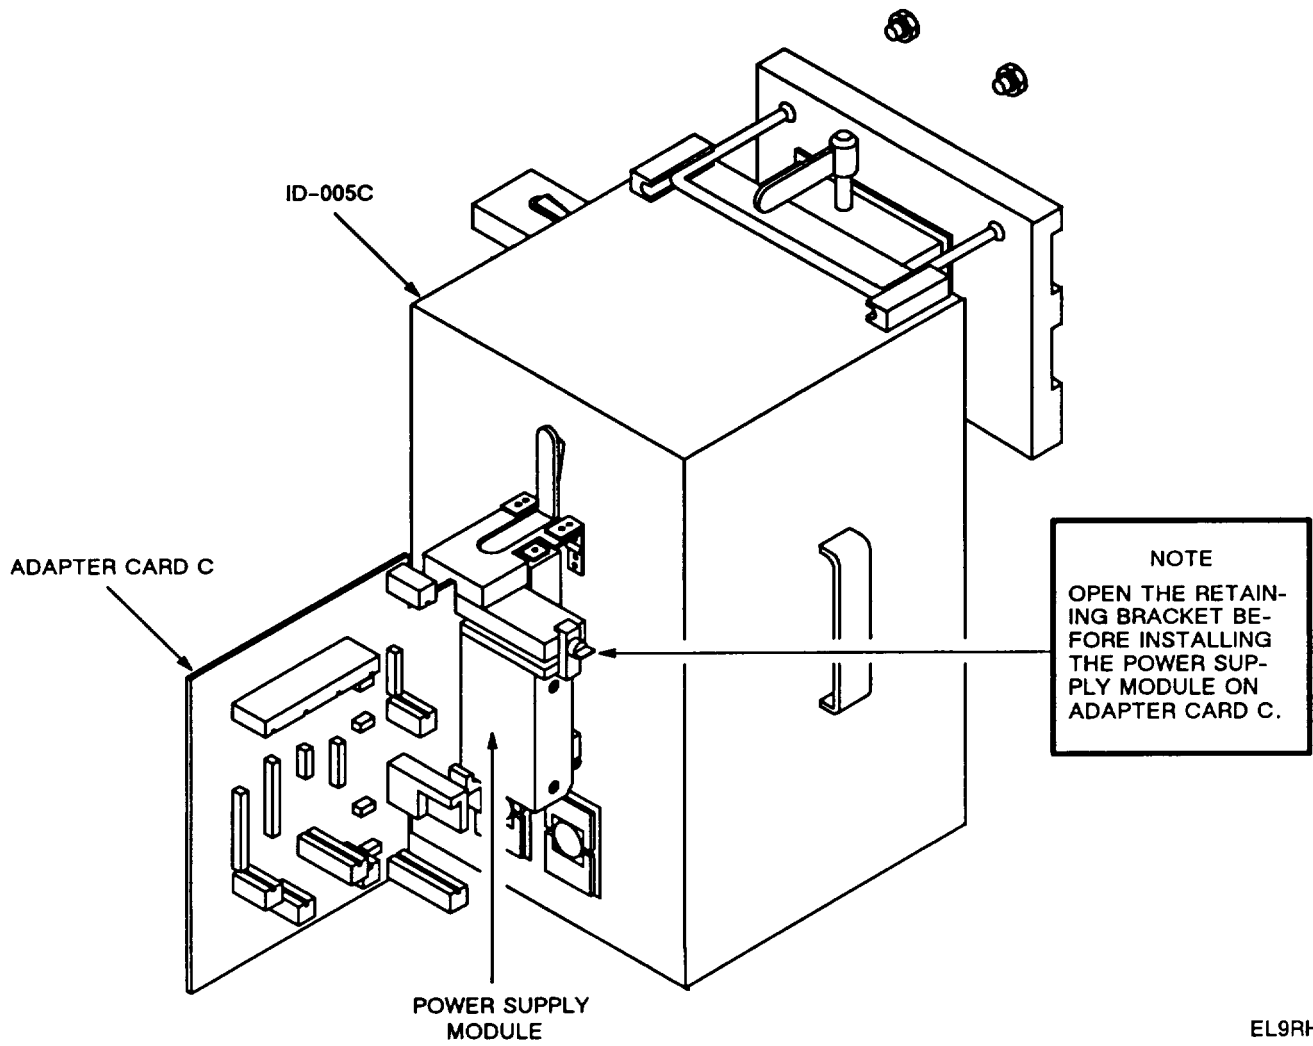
Installation of Power Supply-Module Assembly on Adapter Card C
